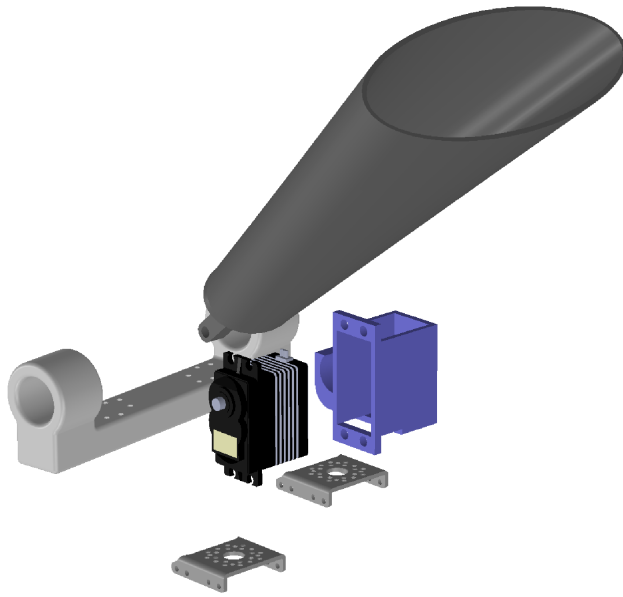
An exploded view of the torso of the Biped walker Prototype
